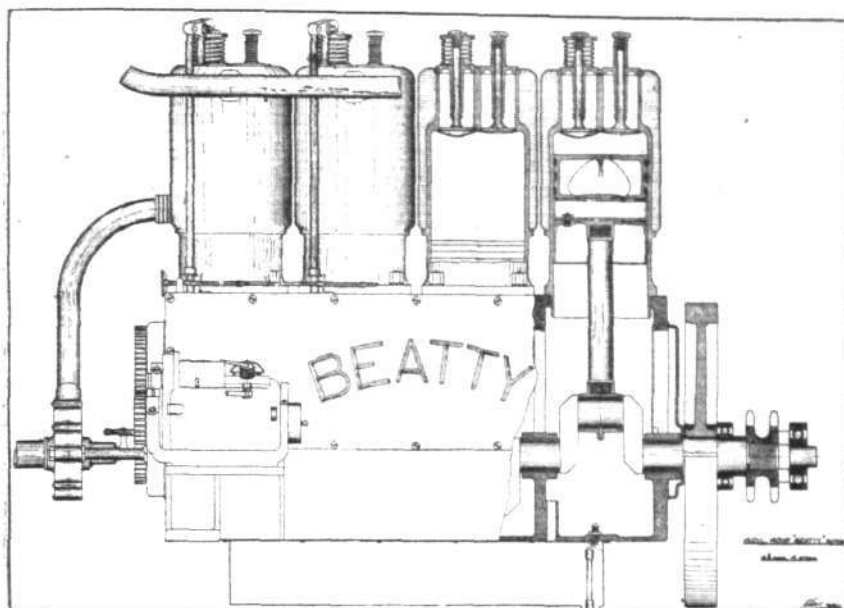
Sectional elevation of the 40-45 h.p. Beatty engine.
